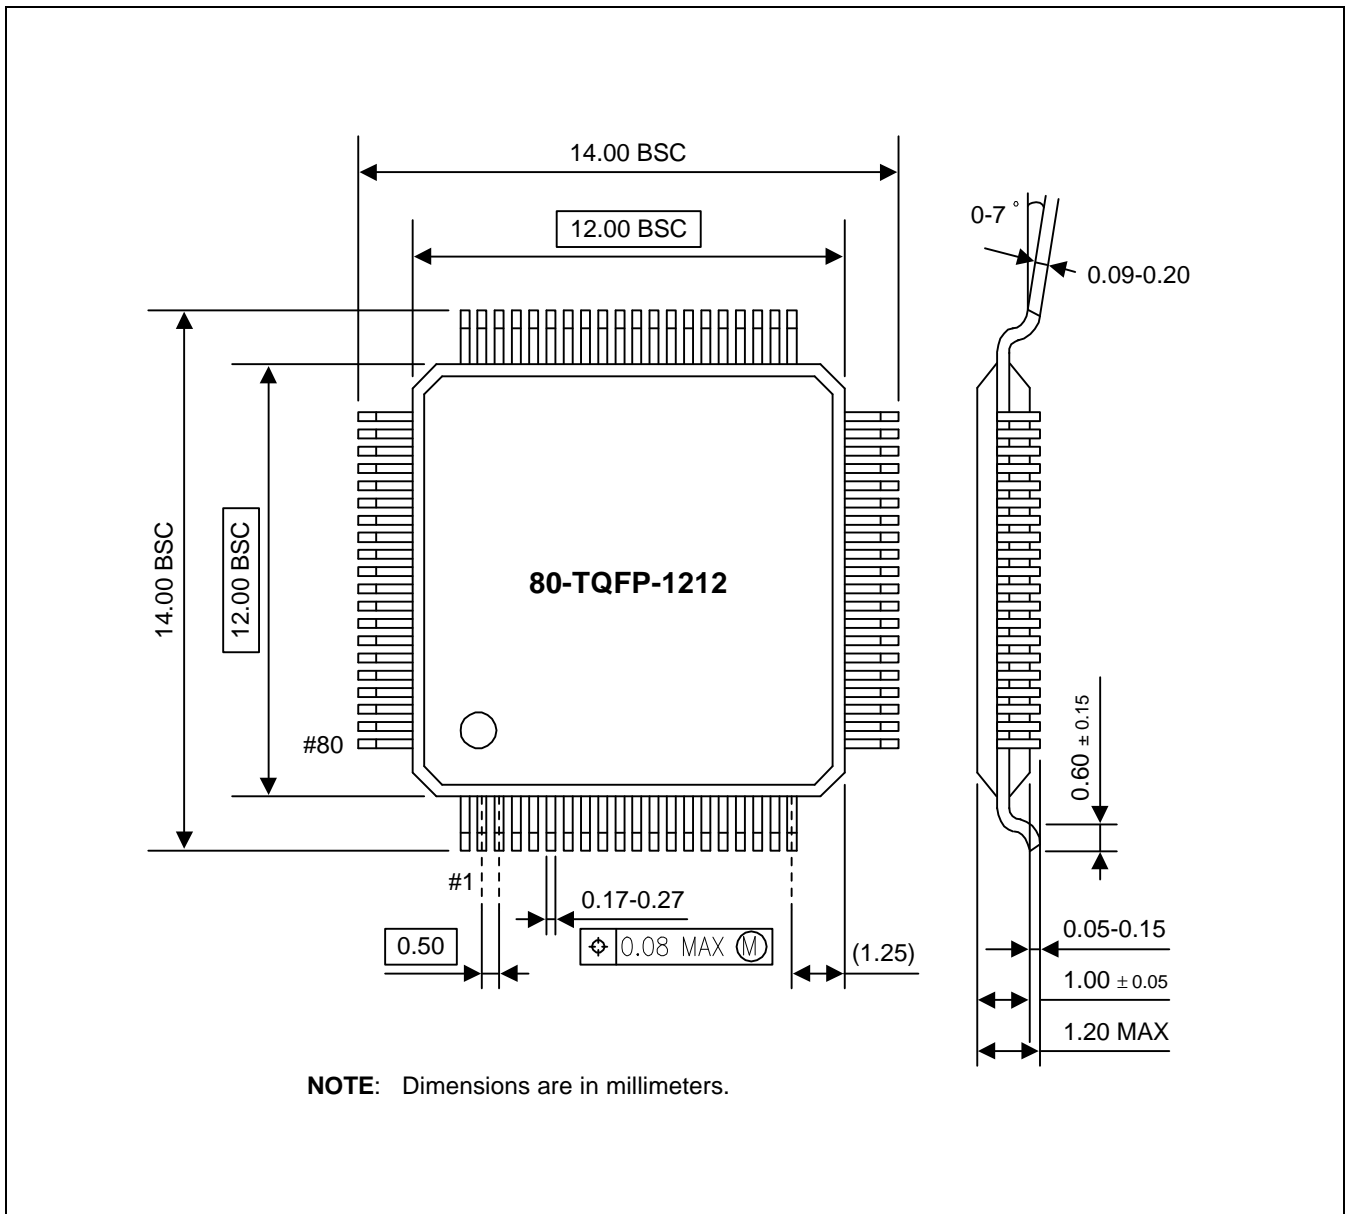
80-TQFP-1212AN Package Dimensions
